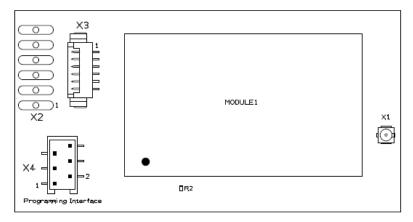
swarm bee LE Dev. Board, PCB placement
